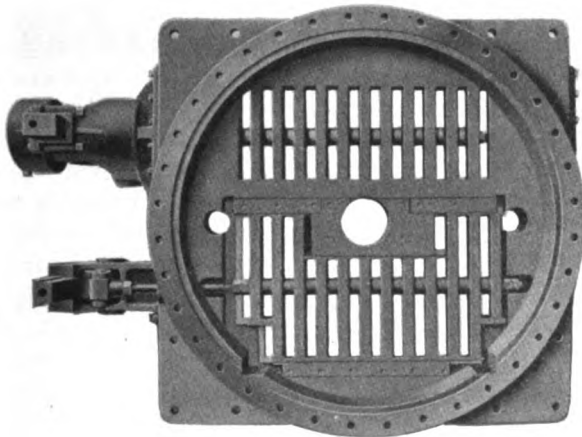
VIEW OF SOUTHWARK CYLINDER HEAD
